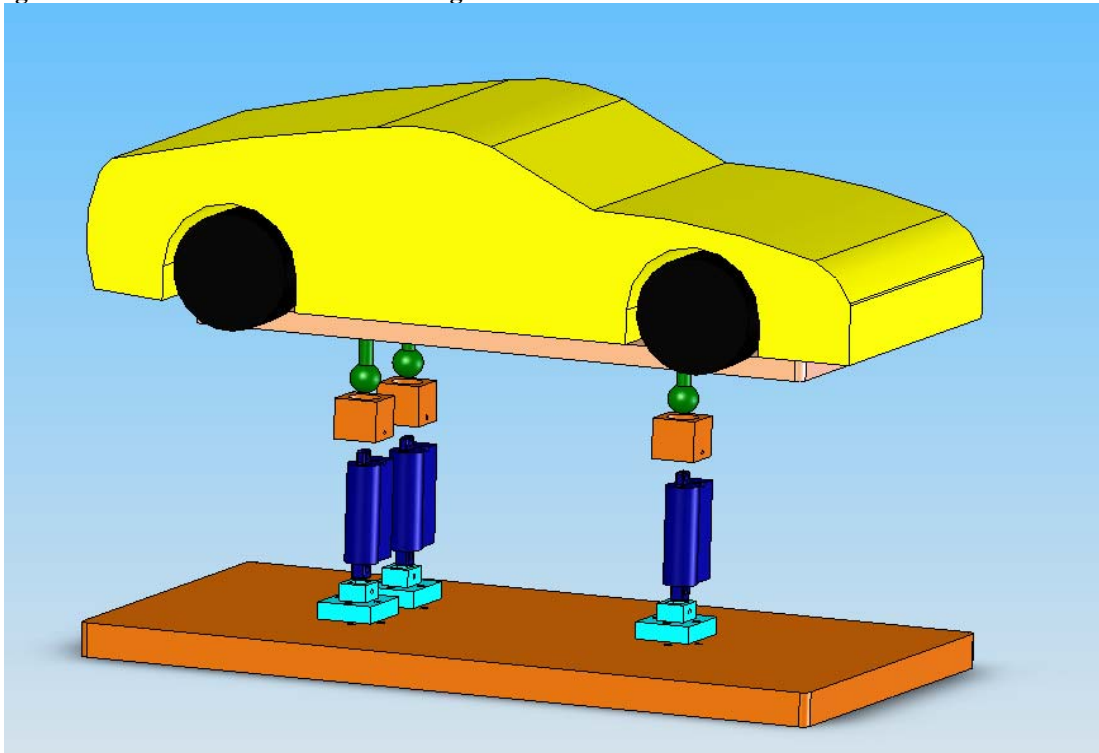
below depicts the subsystem layout of the mechanical connections that will be used for assembling the prototype together.
